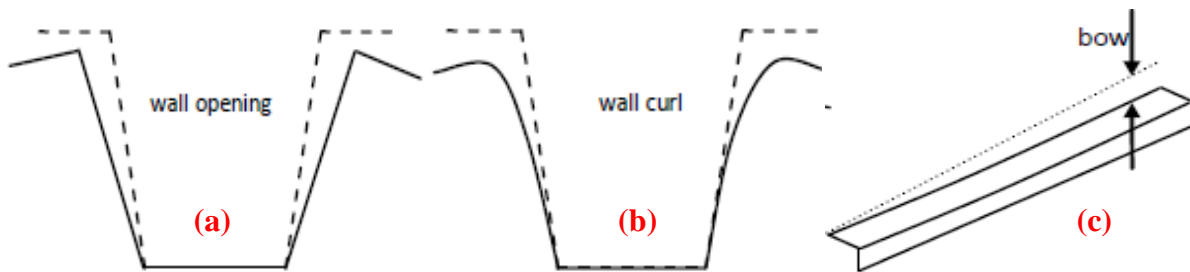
Different types of springback (a) wall opening (b) wall curl (c) bow [2]
